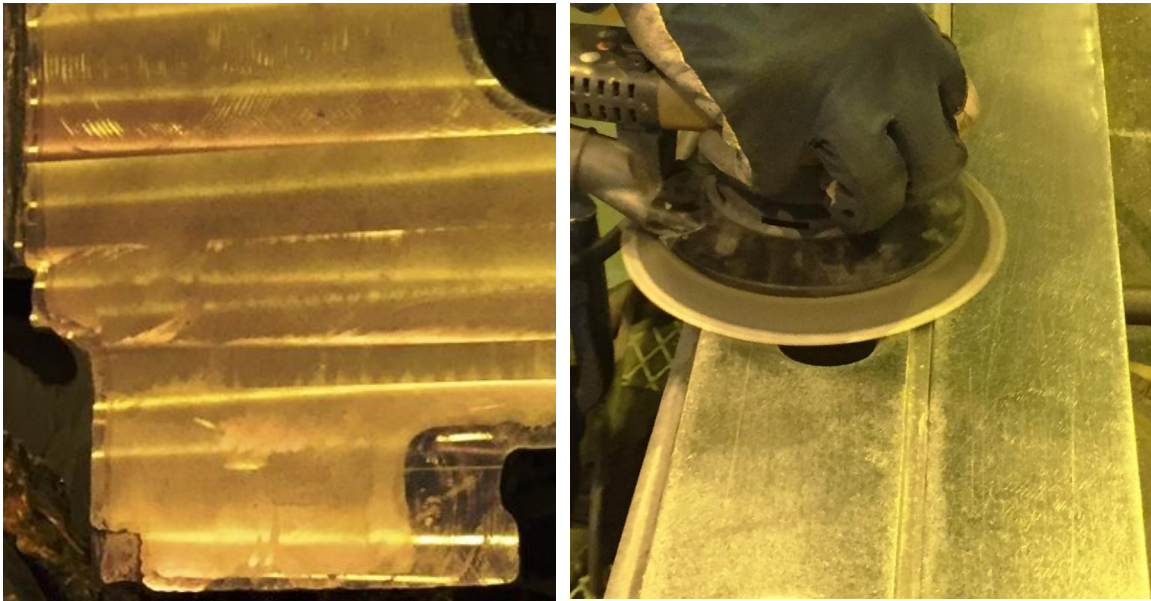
Flange surface after edge welding (photo: J. Sipilä, Telatek Service) .
